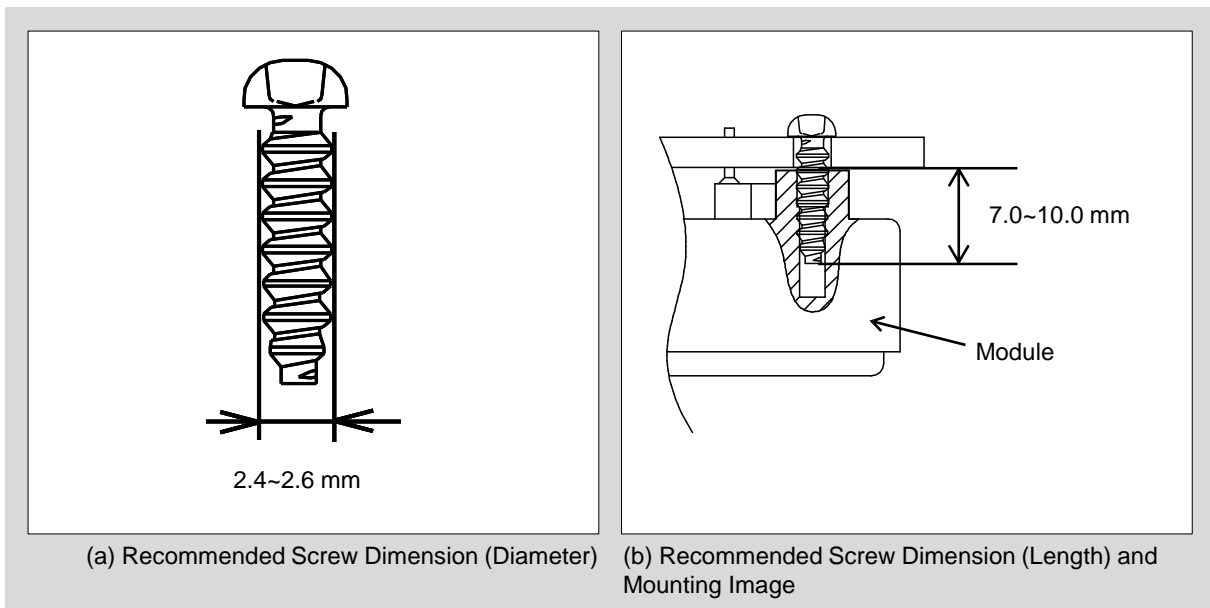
Dimensions of Recommended Screw and Mounting Image
